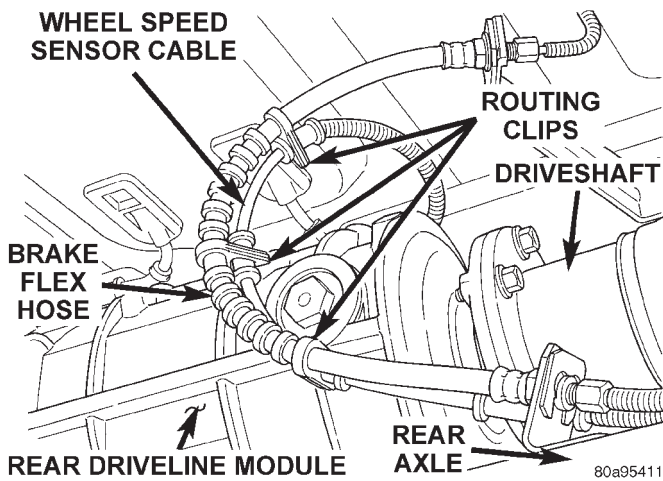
Speed Sensor Cable Attachment To Brake Flex Hose
